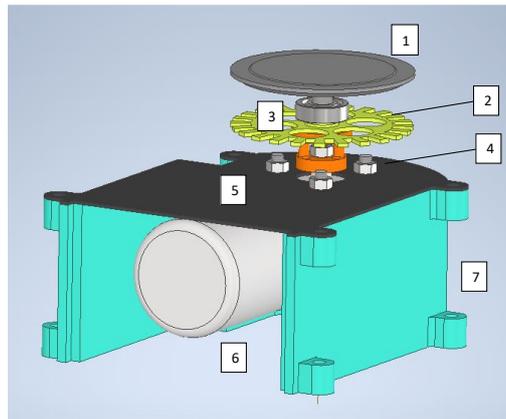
Scheme of powder feeder drive system: 1 – disk, 2 – bearing, 3– serrated wheel, 4 – claw coupling (active and reactive parts), 5 – disc, 6 – motor with worm gear, 7 – motor cover.
